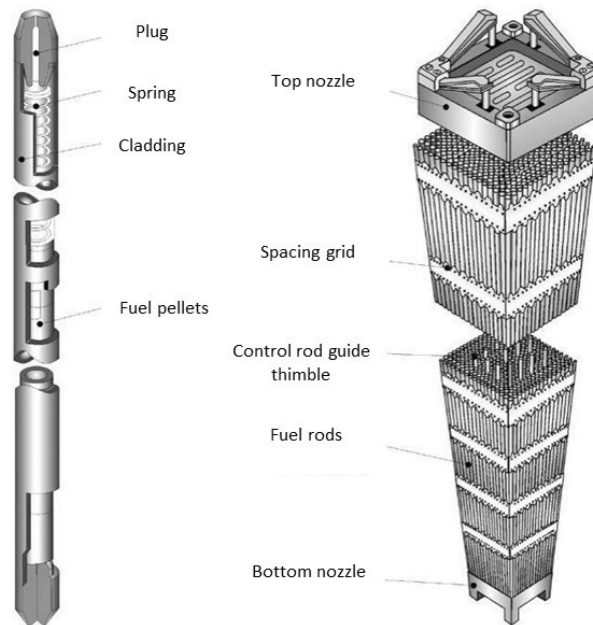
Schematic of a fuel rod (left) and a PWR fuel assembly (right) extracted from [4].
